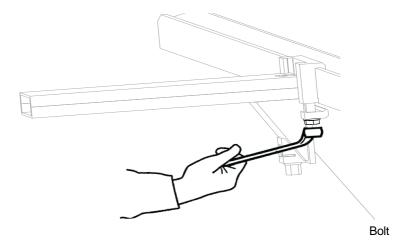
Tightening the fastening arm onto the lifting platform.
